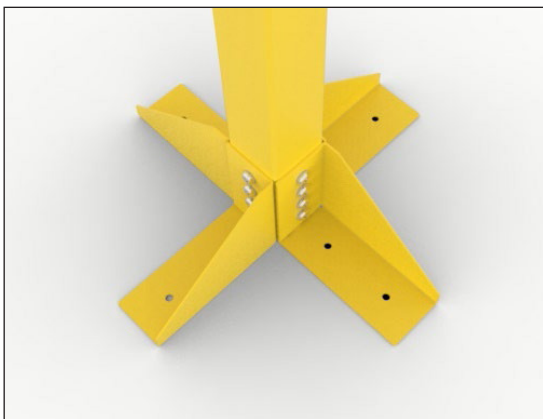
Pre-Drilled Holes for Bolting the Bast to the Floor
